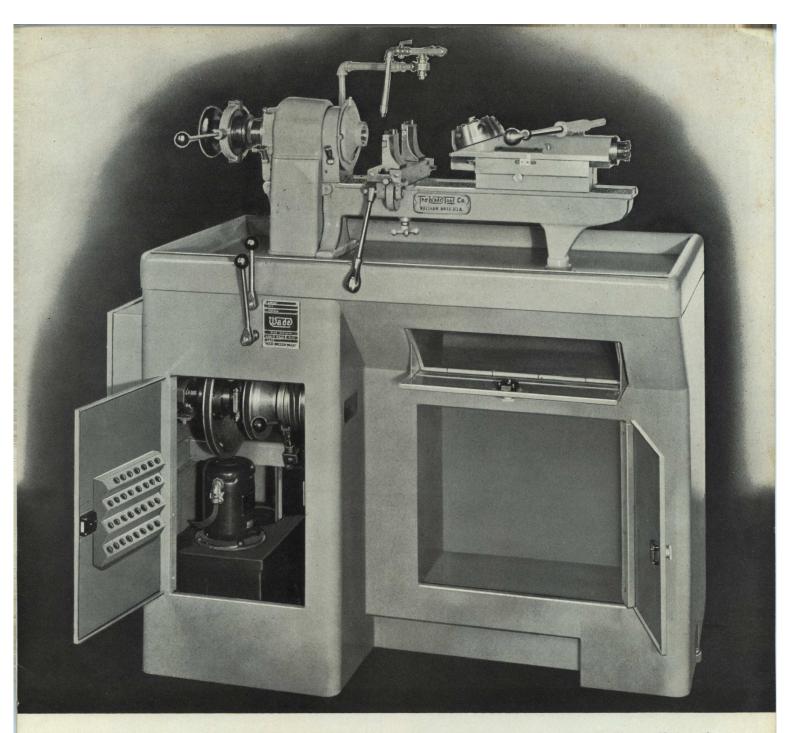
Front View of Wade Precision Hand Screw Machine—Showing Drive Unit, Coolant System Unit, and Ample Storage Space
